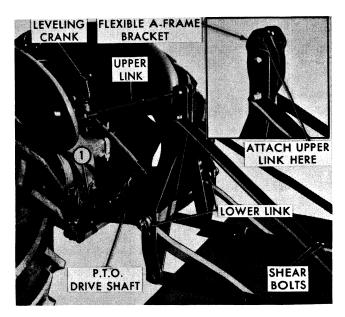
Cutter Attached to the Tractor — P.T.O. Shield Removed for Illustration Purposes
